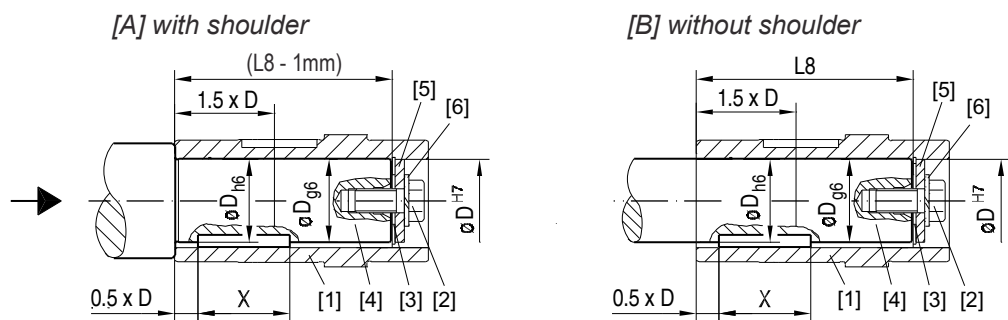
Customer shaft with contact shoulder [A] and without contact shoulder [B]
